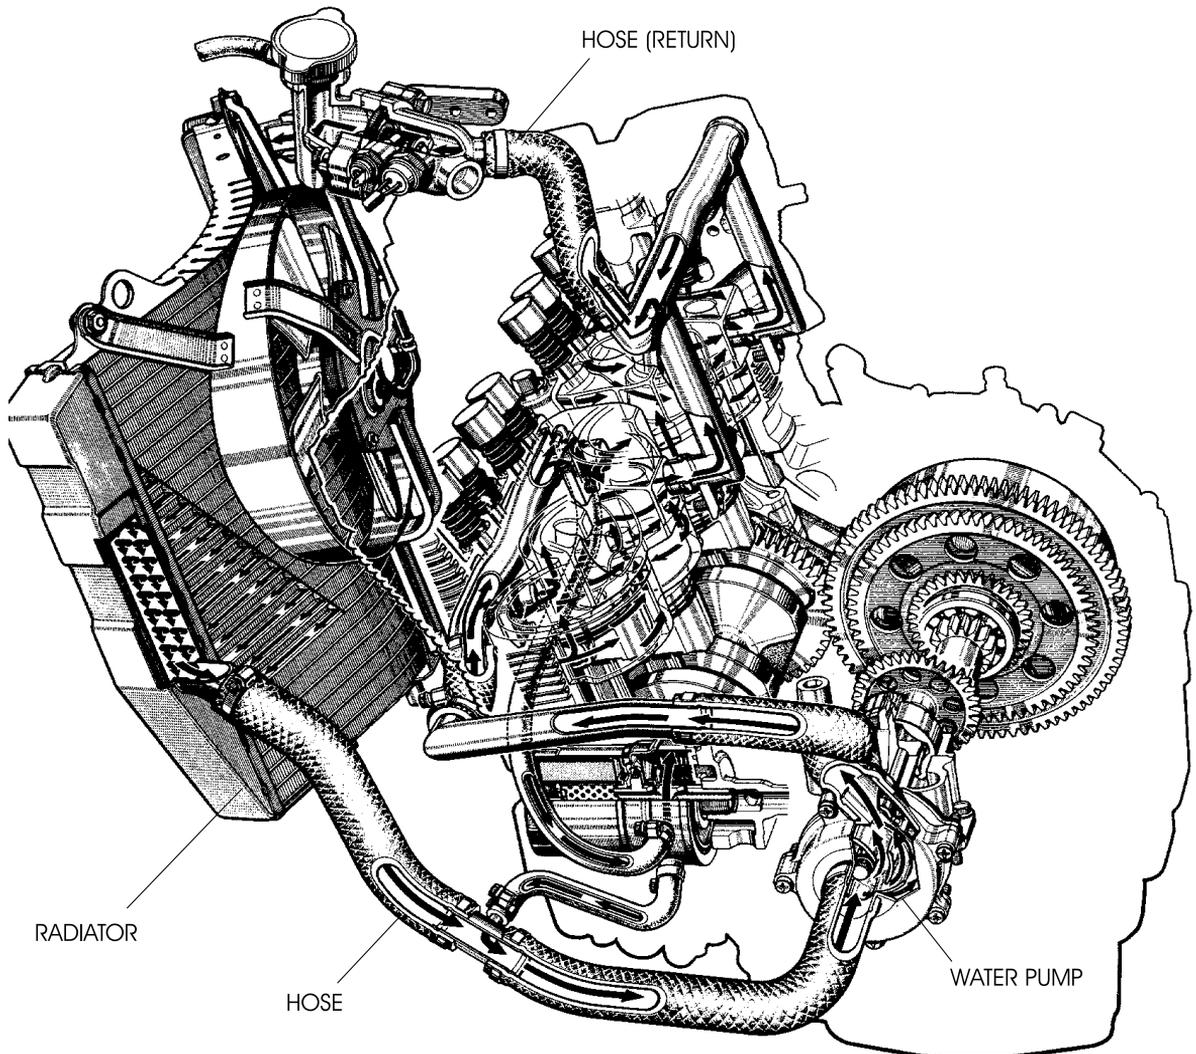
This illustration shows the system components in a four-stroke liquid-cooled engine.
